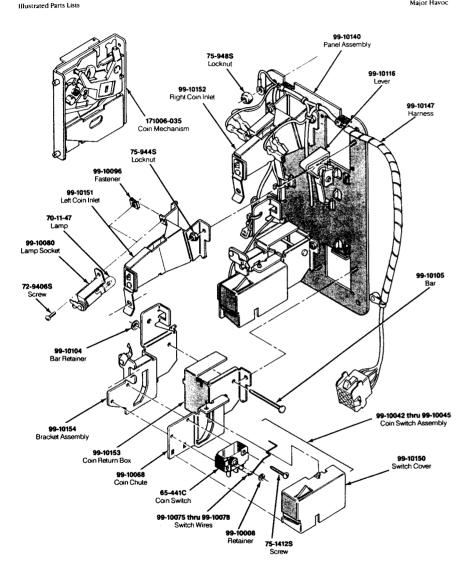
Coinco Coin Door Assembly 171027-001 A
